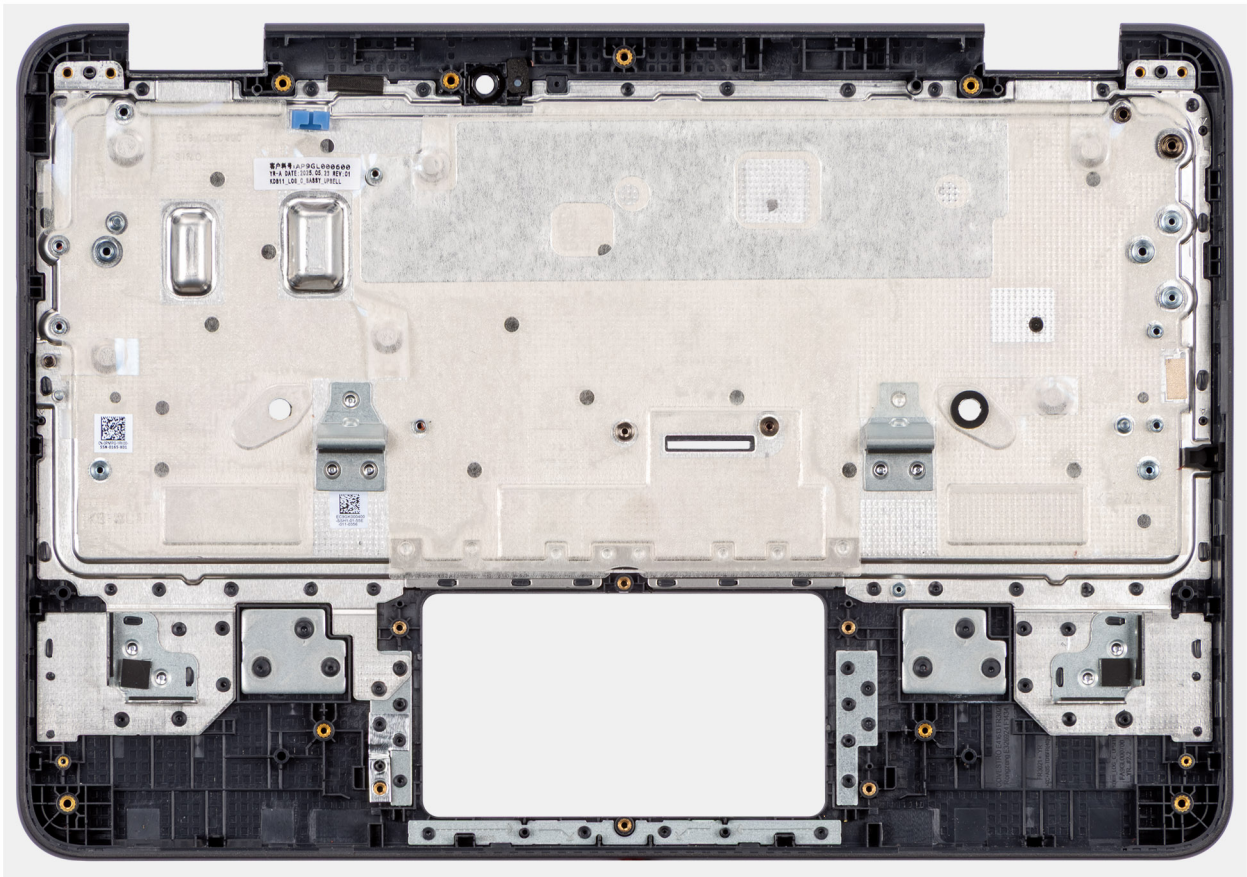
Installing the palm-rest assembly for models shipped without WWAN
